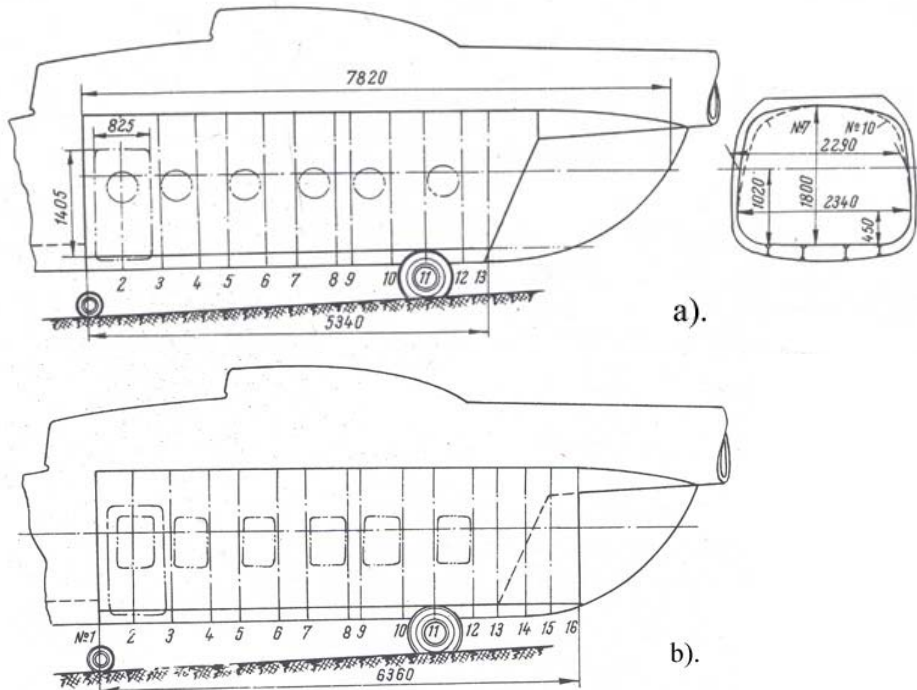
The internal dimensions of the Mi-8 cabin , a) cargo cabin, b) passenger cabin.
